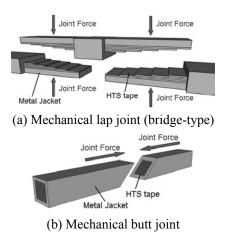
Remountable joints of a stacked HTS conductor with metal jacket.
